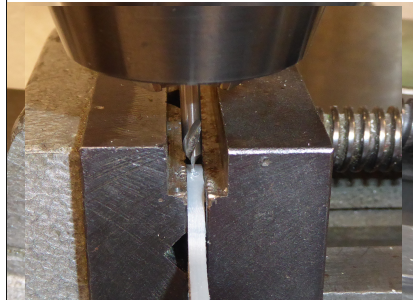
Clamp Inner Gimbal for beam centering drill D1x1 at +/- 90 Degree
